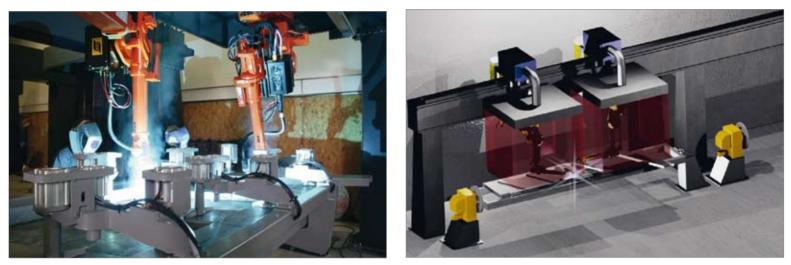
One side of a gantry welding station during test welding at Andon. The complete station consists of two welding tables with fixtures, one gantry, two suspended IRB2400L ABB robots equipped with the ESAB W8 Robot package, including two Marathon Pac bulk drums with 250 kg of OK Autrod 12.51 MAG wire.
